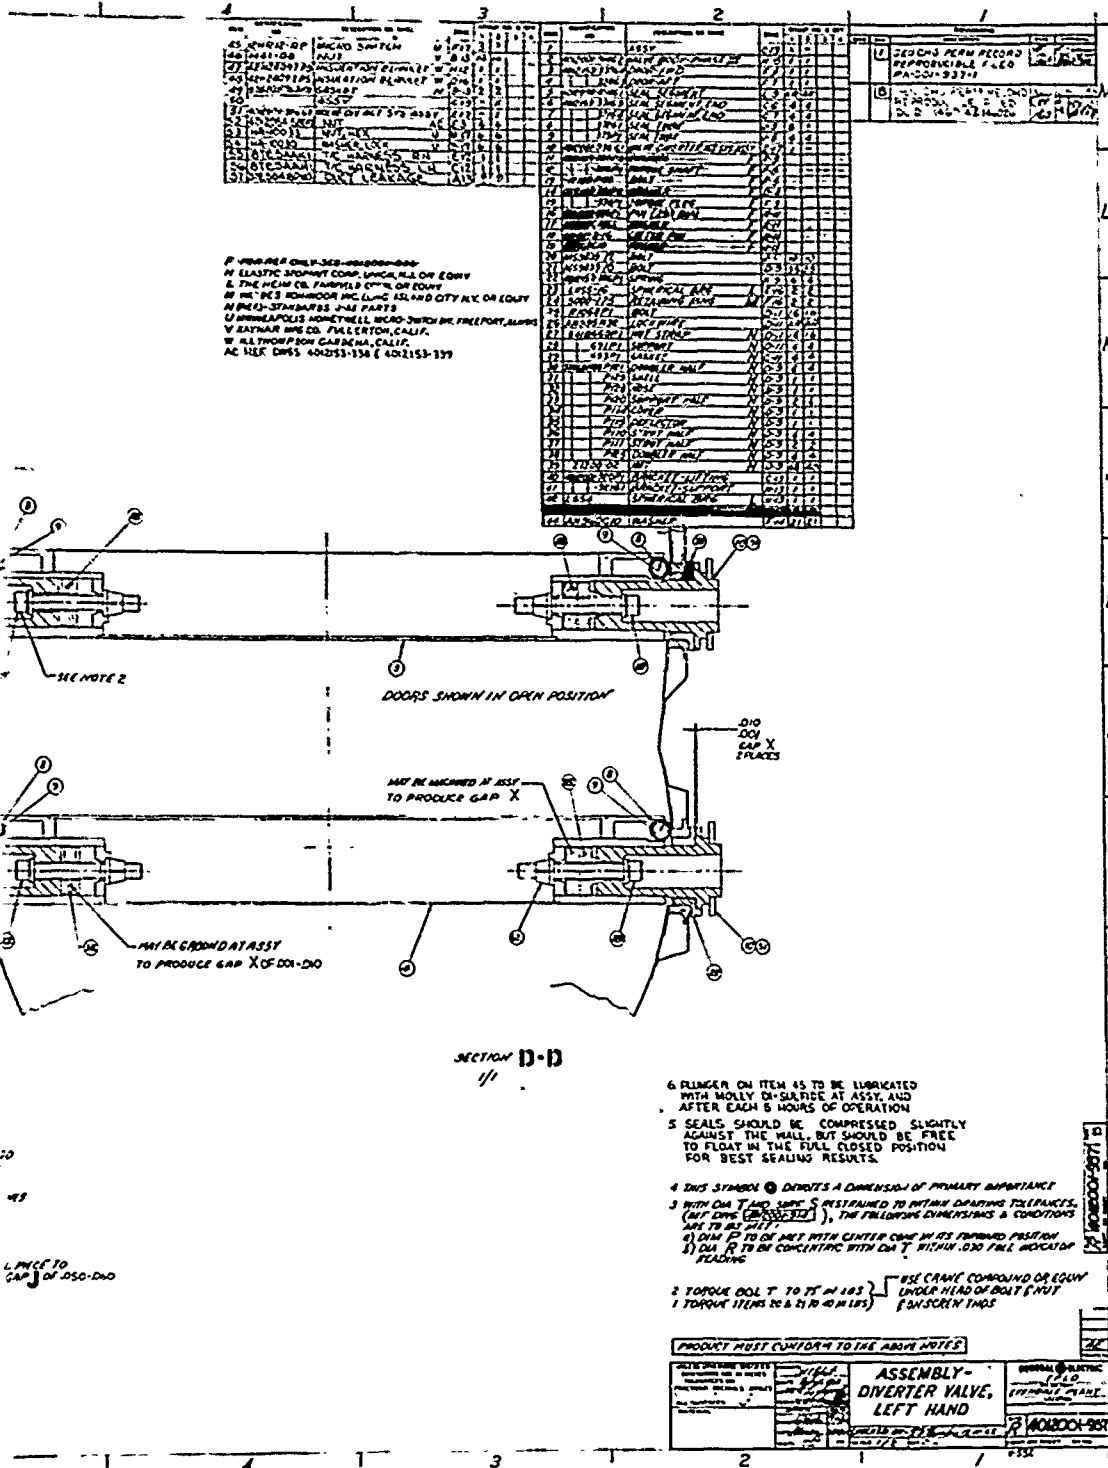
ASSEMBLY DRAWING, LEFT HAND DIVERTER VALVE, (4012001-937) Sheet 2 of 2
